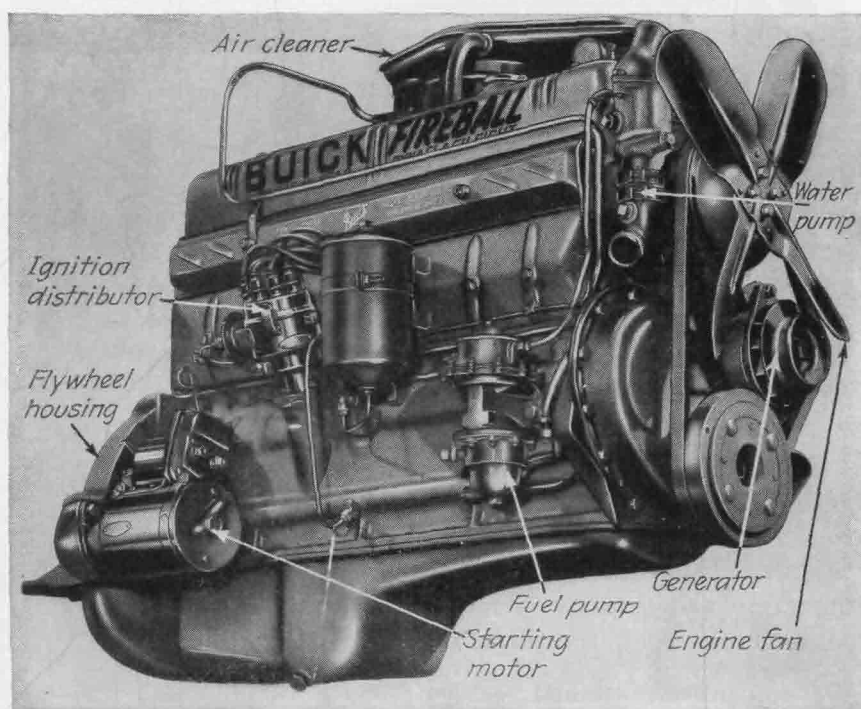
Mounting of fuel pump on engine. Other accessories, including water pump, ignition distributor, starting motor, and generator are also shown. (Buick Motor Division of General Motors Corporation)
